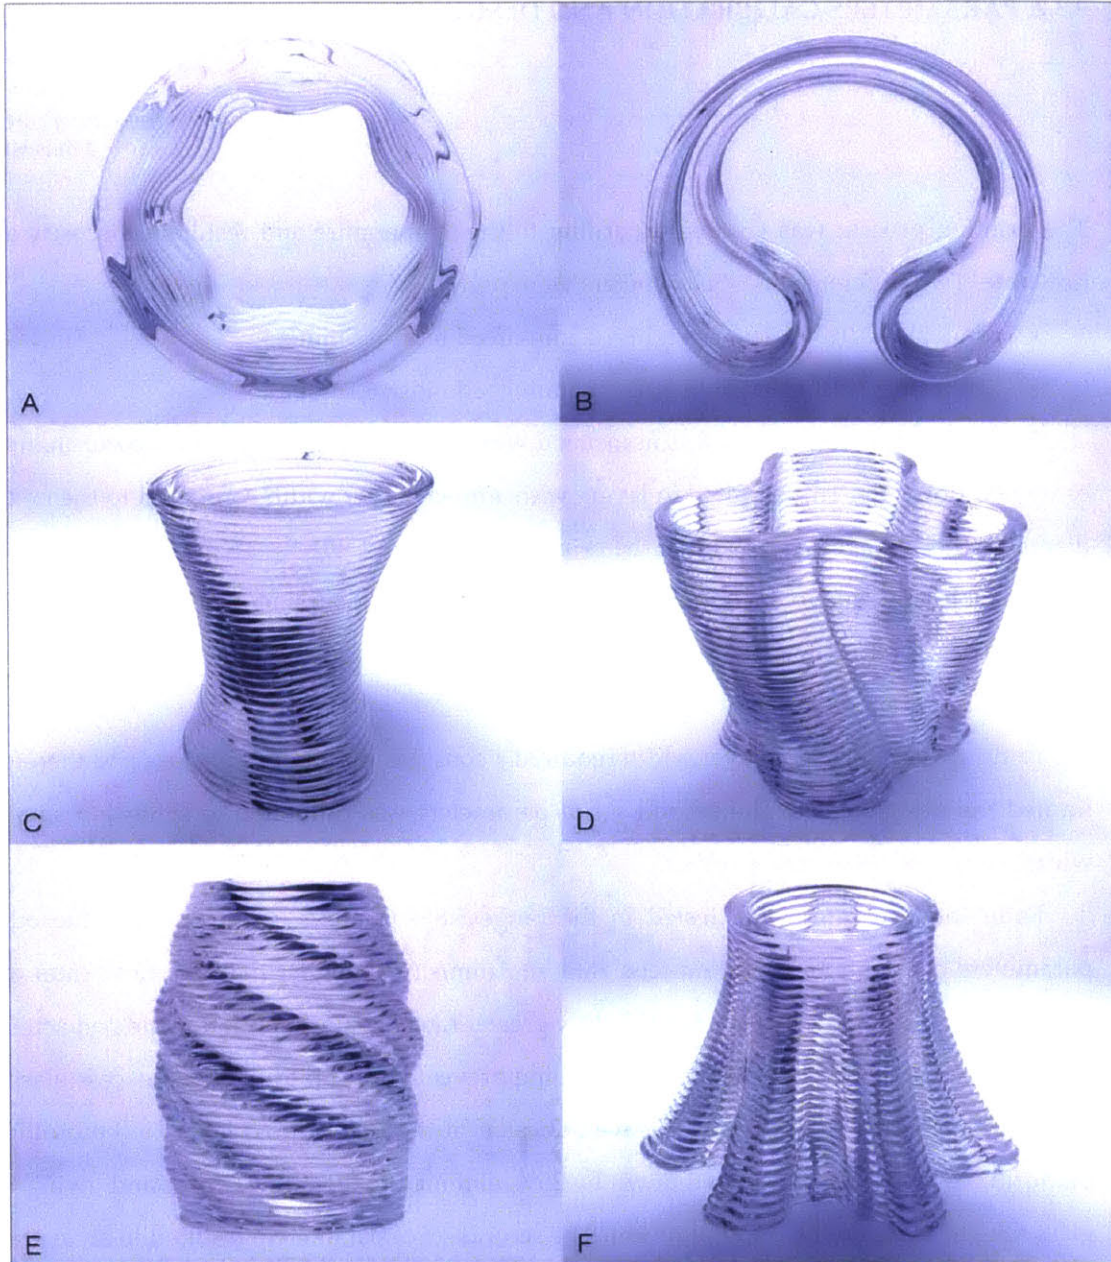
Objects printed using the platform. (A) Parameters set (PS) 1, layer width; (B-F) PS 2, exploration of design space: (B) large radii, no drafting, focus on layer width; (C) smaller radii, higher drafting; (D) same as (C) but with changes in concavity/convexity in plane; (E) changes in concavity/convexity out of plane; (F) smallest radii and highest draft angles (Image credits: Chikara Inamura)
